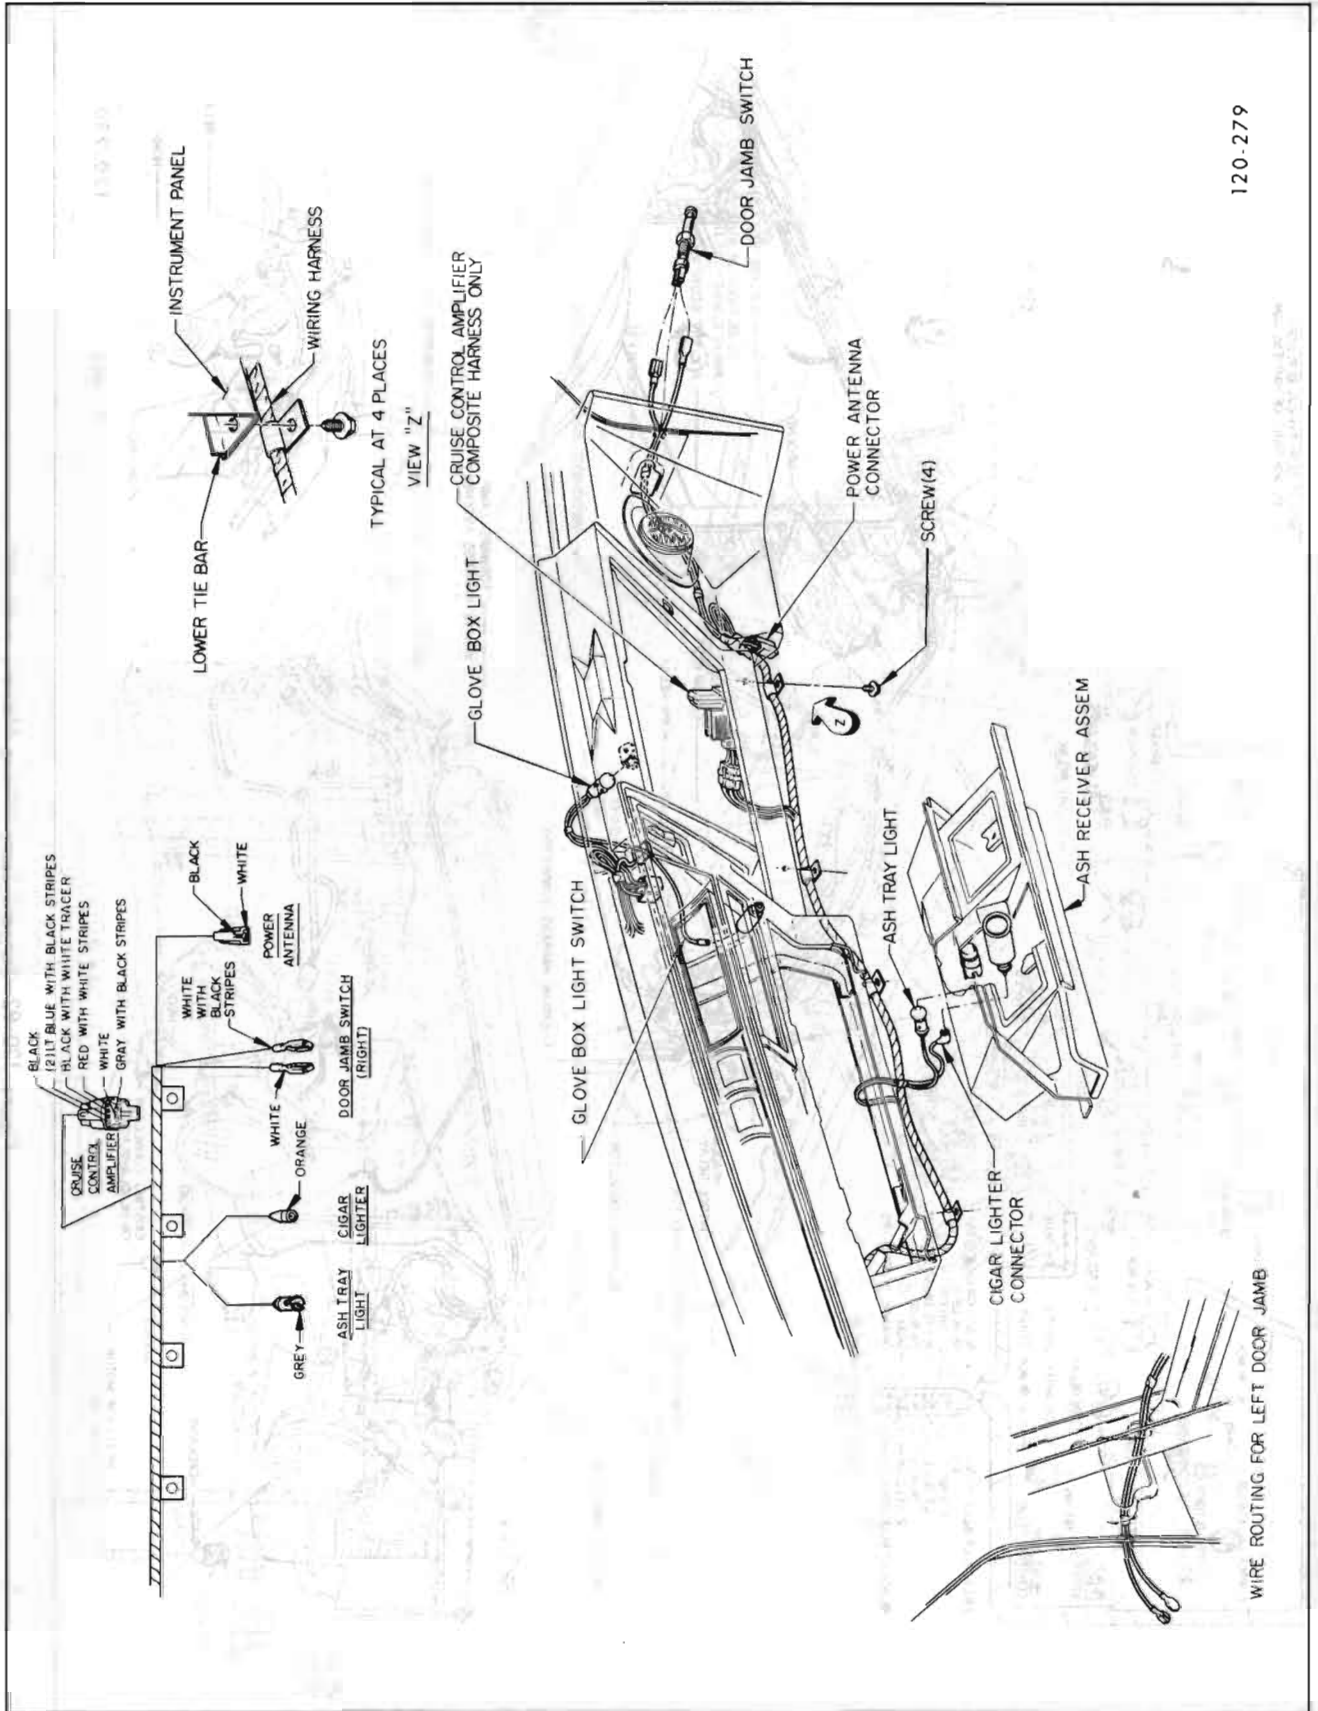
Ash Tray and Door Jamb Wiring - Riviera
